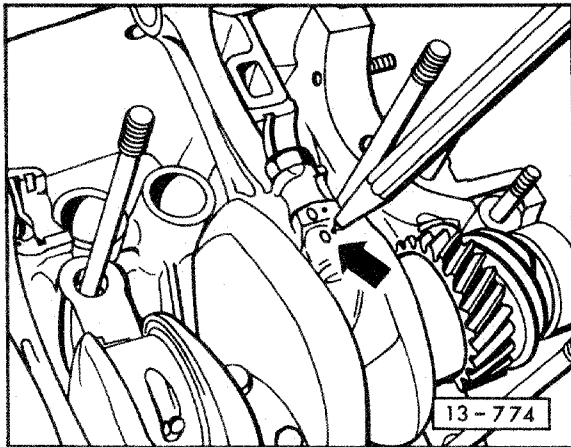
Mark matching connecting rod/bearing cover with cylinder
